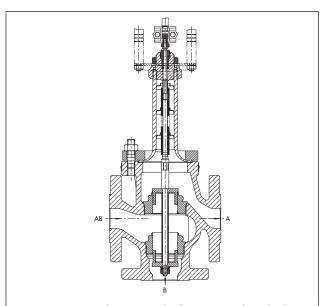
Type 3535 Three-way Valve for Heat Transfer Oil · Plug arrangement for diverting service
